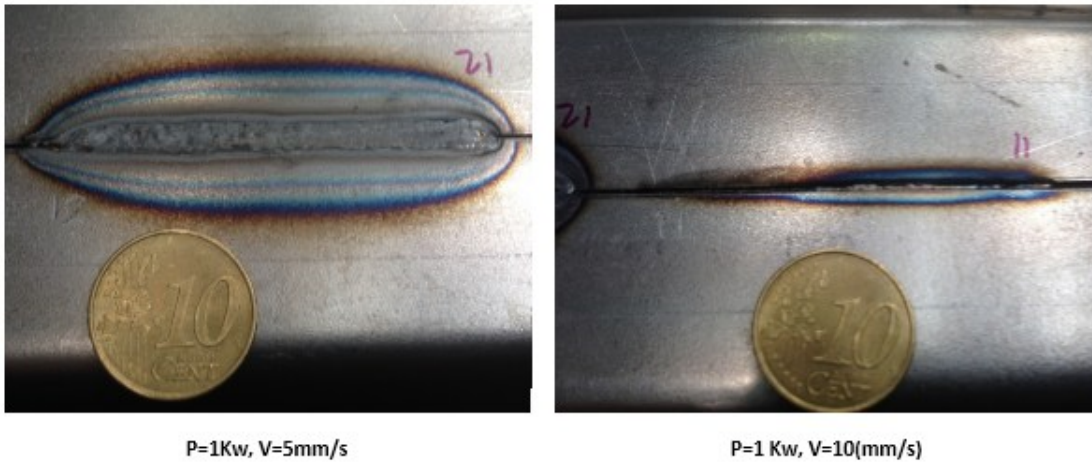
Proximity laser welding, spot dimension=0.1 mm
